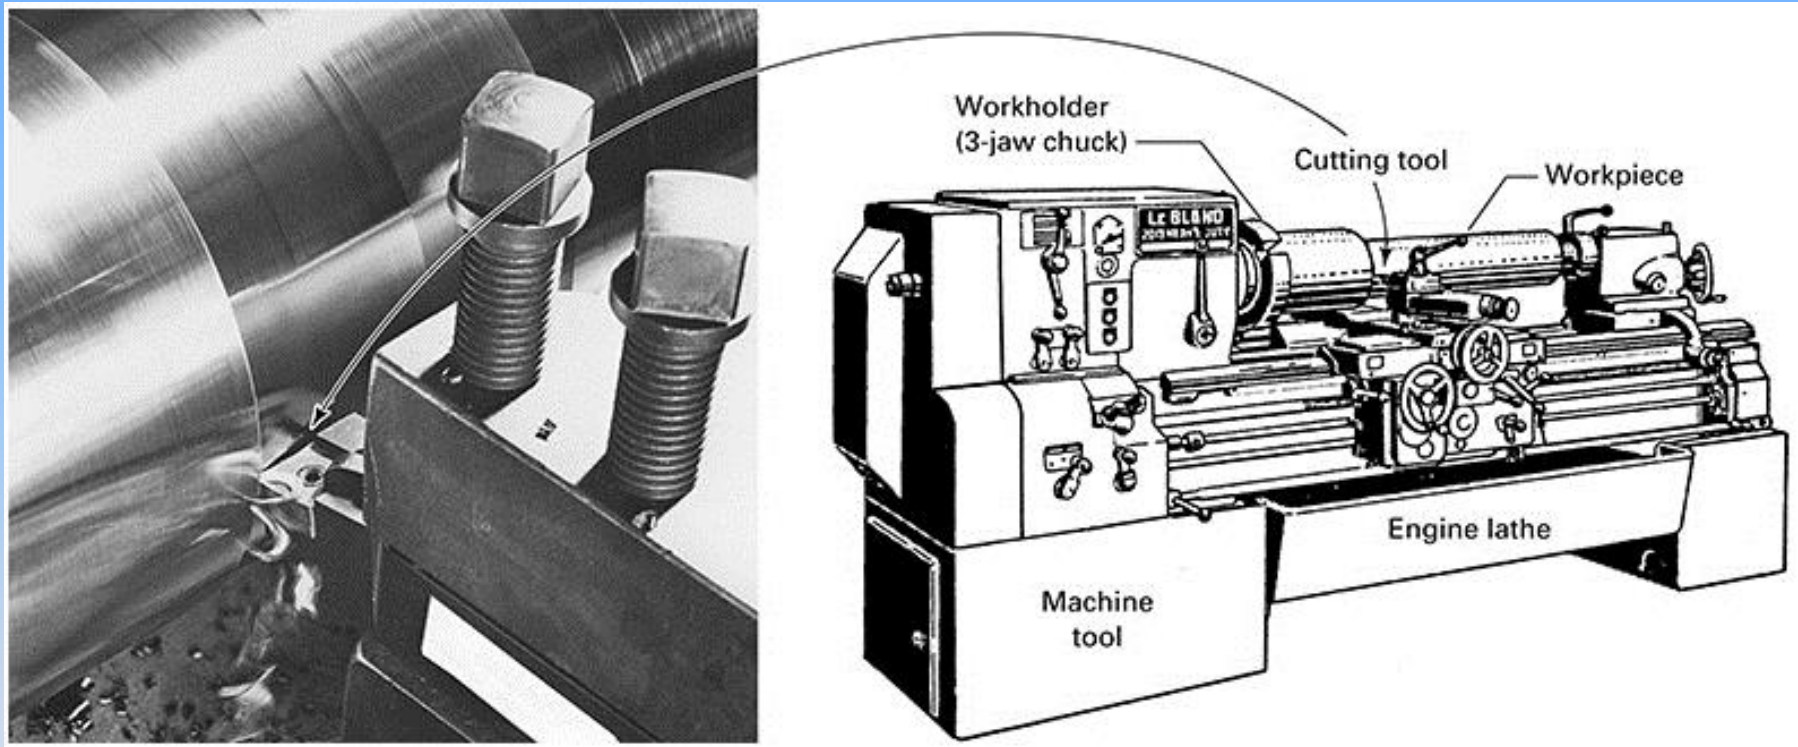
Schematic of a standard engine lathe performing a turning operation, with the cutting tool shown in inset.
